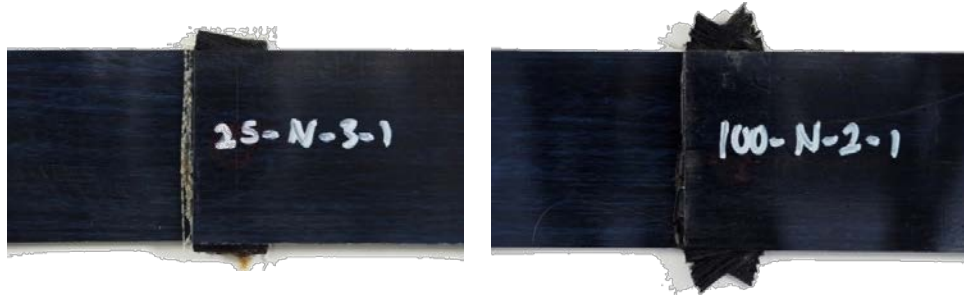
Examples of plate deformation due to excessive melting during welding.
